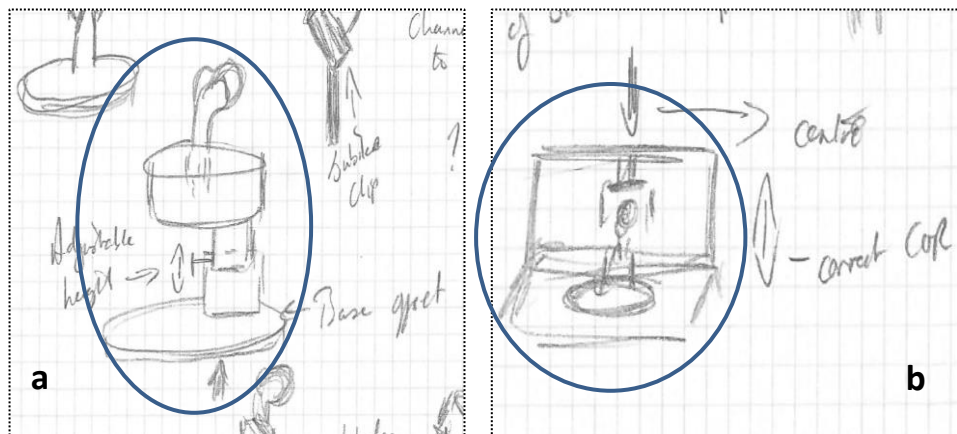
Concept drawings for (a) the test fixture and (b) the potting jig, selected for further development in the design process.
